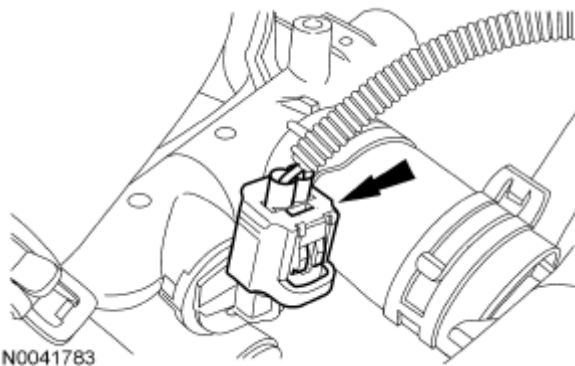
Locating Coolant Temperature Sensor Electrical Connector
